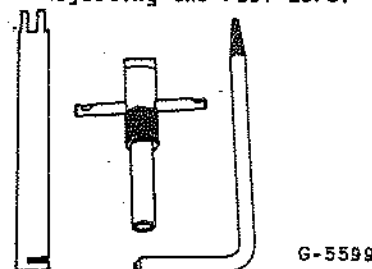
Tool Kit Including Adjusting Fuel Level Float Tang
